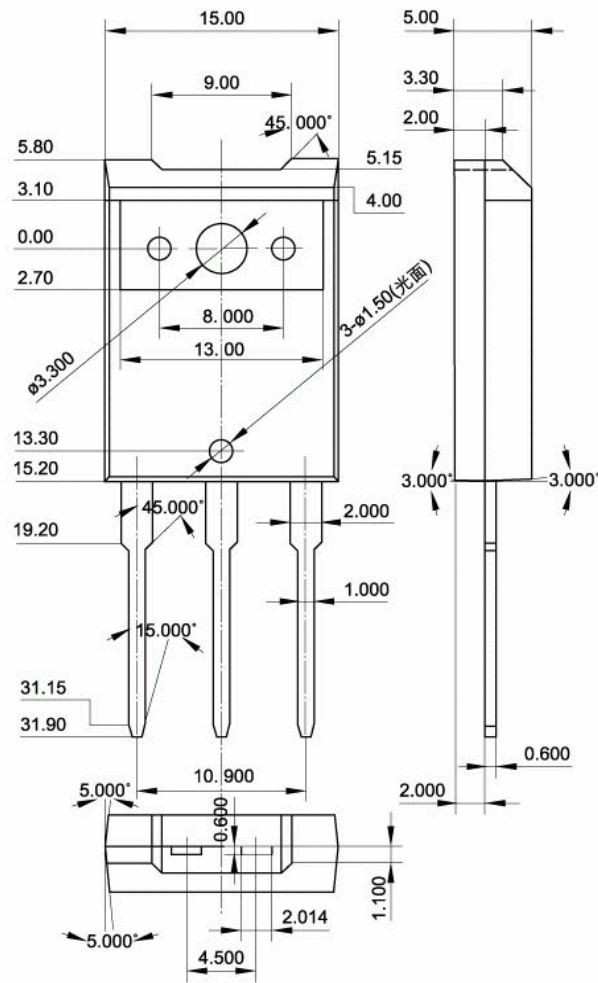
Outline dimensions (unindicated tolerance: $\pm 0.30\text{mm}$)
